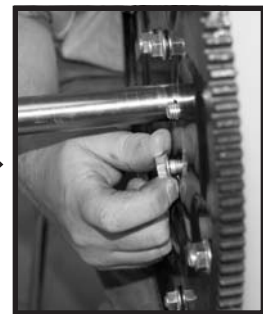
Verify that the holes of the mixing drum, the plate assembly and rubber pad are properly aligned.
